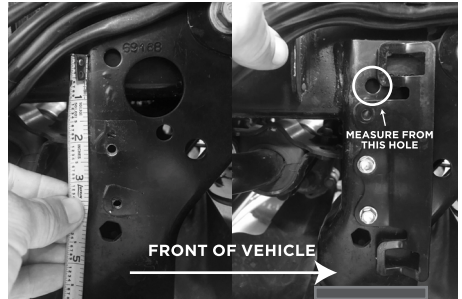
RUBICON(passenger side): Use the bottom 2 holes on the bracket to mount.
